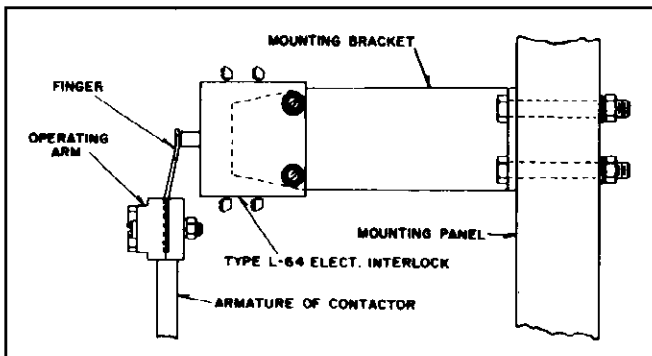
Type L64 Auxiliary Contact Mounting on Contactors M-810, M-810R and M-910
